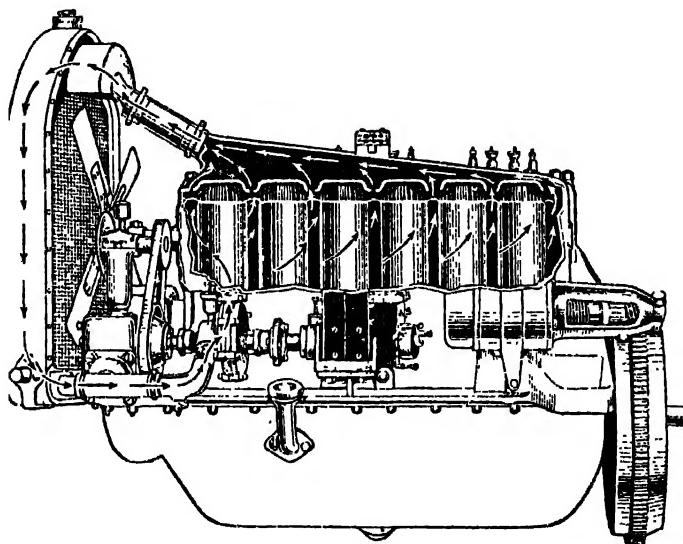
Overland Six Cylinder Engine Showing Cooling System Parts.
